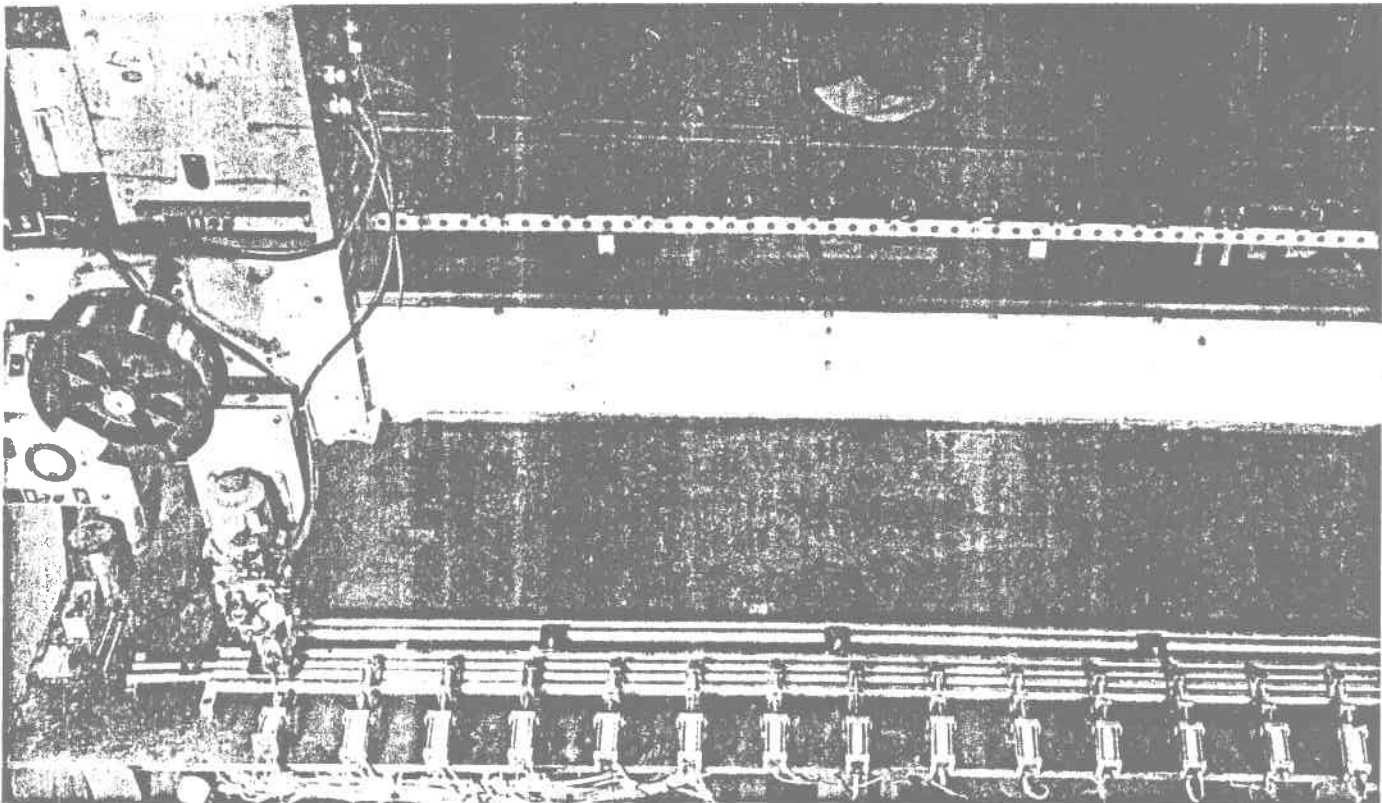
Welding of Four-Tube Subassemblies for Third Development Panel
